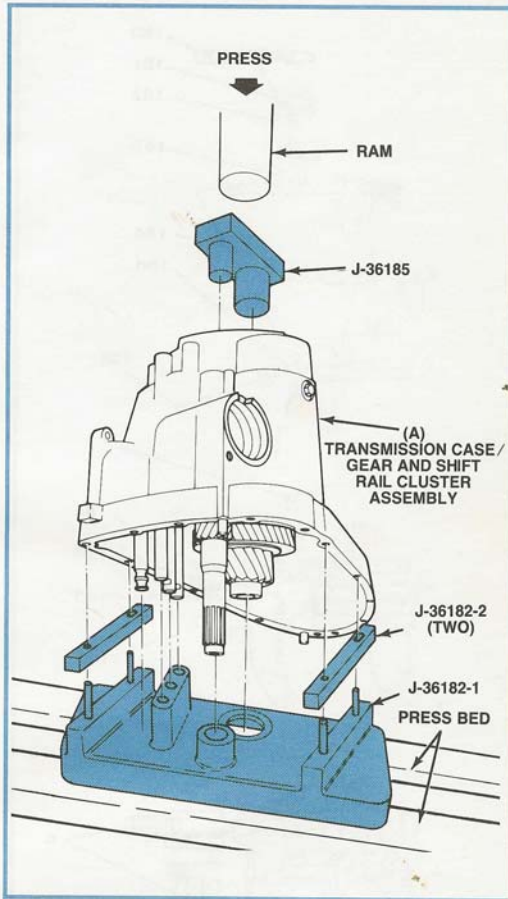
, Transmission Case and Gear/Shift Rail Cluster Separation.
